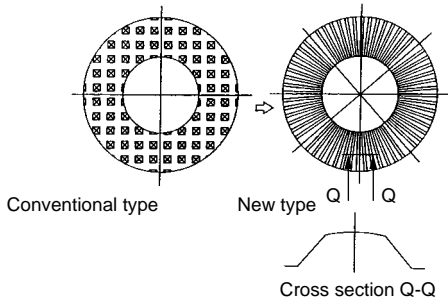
Design for inside bottom of new drawn cup⁹⁾
